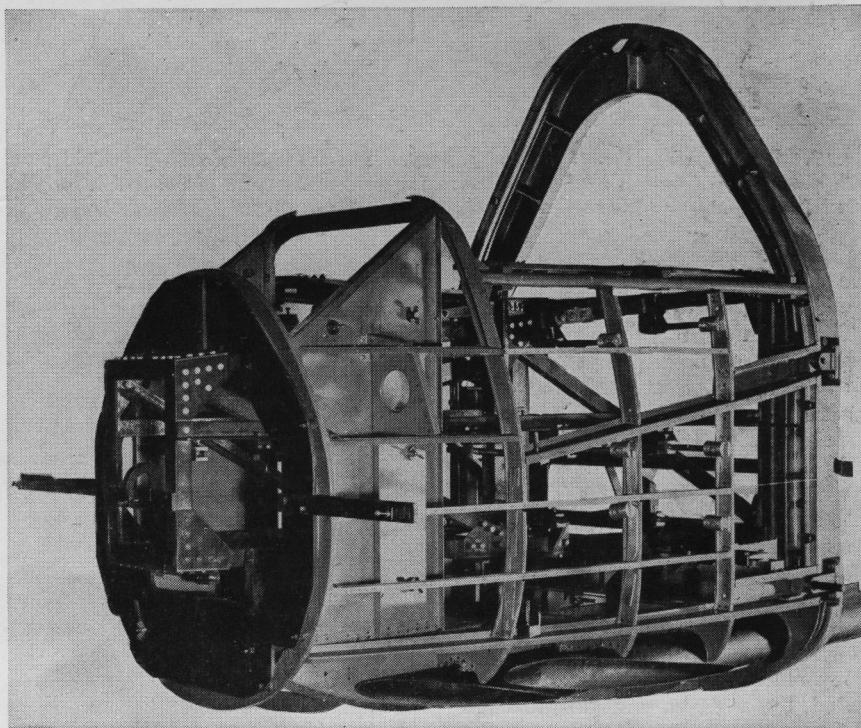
The nose frame is built between the heavy back forging and front member of sheet metal. U-section stringers connect extruded T-section ribs. At the bottom, on each side, are blast tubes for machine guns.
